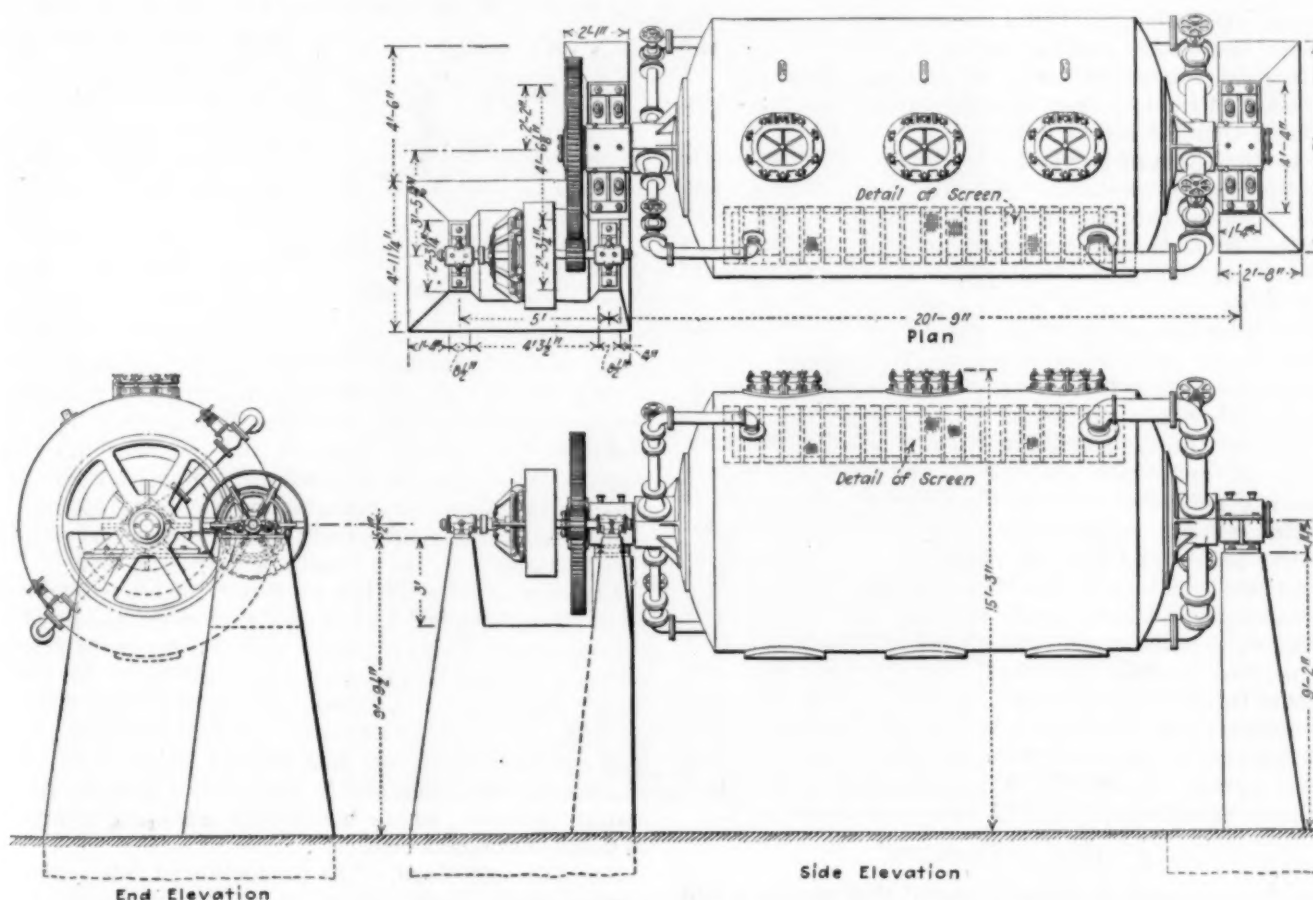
PLAN AND ELEVATION OF ROTARY EXTRACTOR
